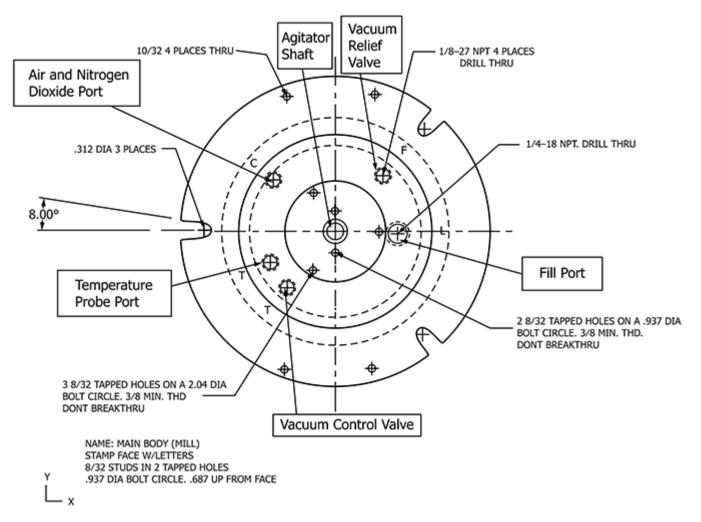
Reaction Vessel Head (all dimensions are in inches)
